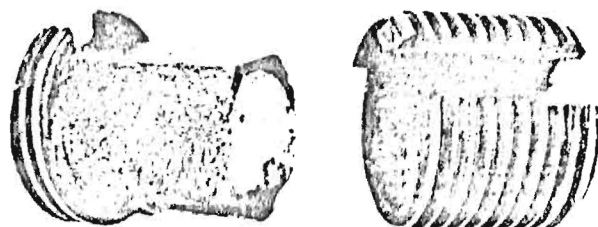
C — Another specialized type of fatigue fracture due to reversed torsional stresses is the peeling fracture. This keyed shaft developed two fatigue cracks, one on each side of the keyway. These continued inward around the shaft because the nut on the threads prevented the crack from reaching the surface. Eventually, the two cracks met on the opposite side, permitting the shell to separate from the shaft. The steel was a cold drawn, resulfurized grade with medium carbon content.
